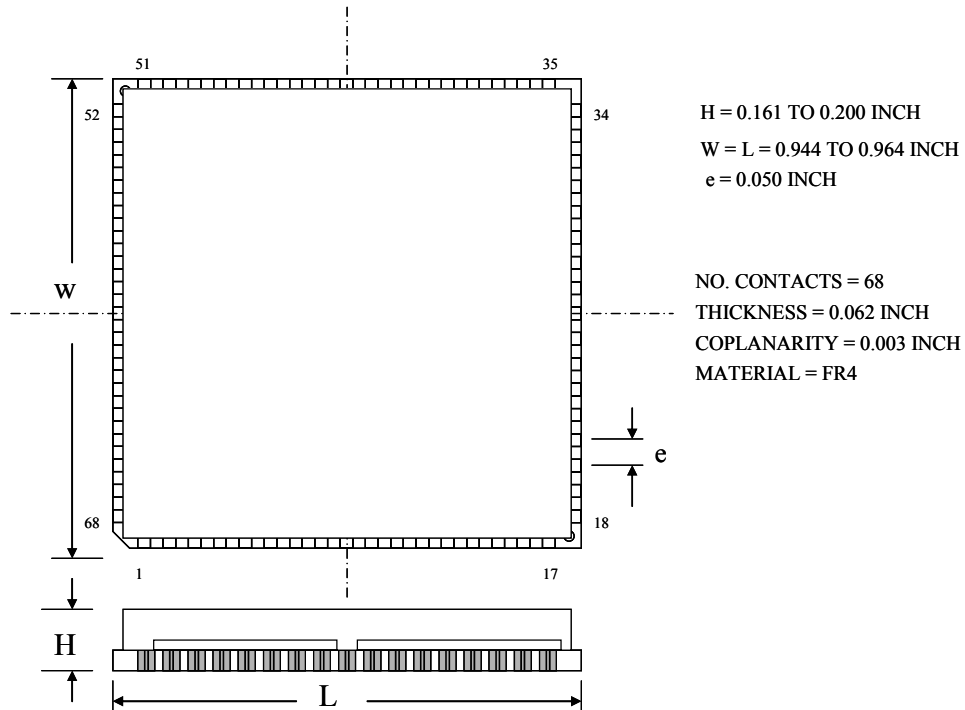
Mechanical Outline Drawing of OEM Edition Module
